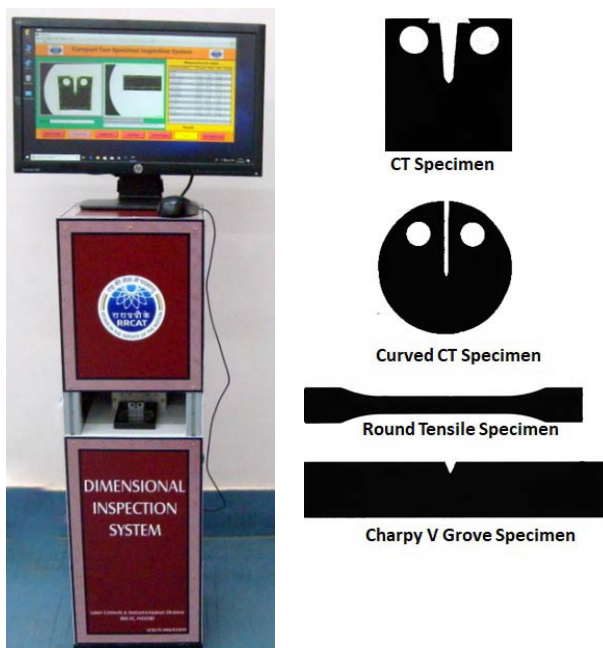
Inspection system for measurement of irradiated samples.
